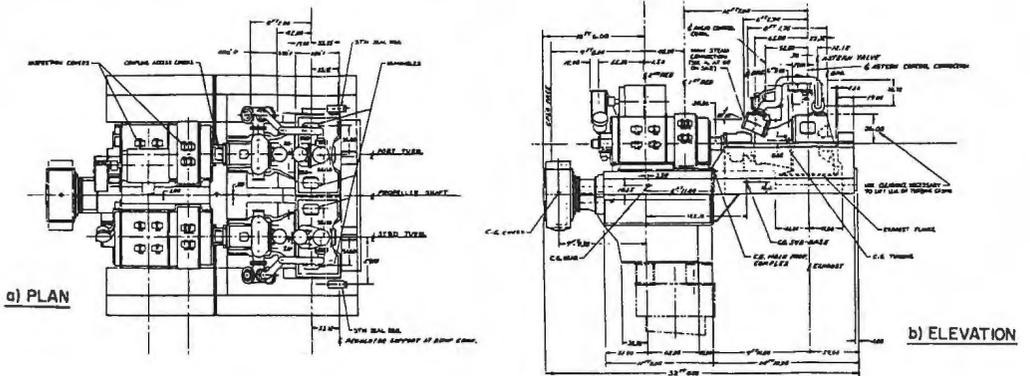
Ship Main Propulsion Unit - Plan and Elevation
